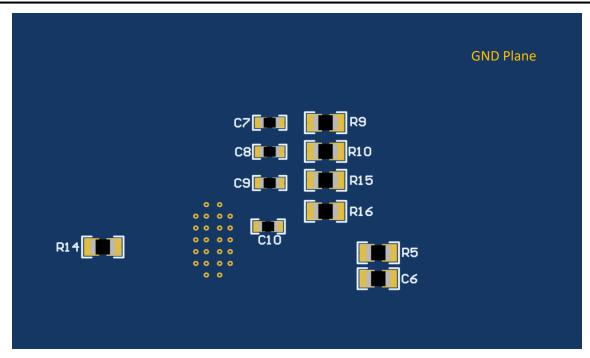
Printed Circuit Board Layout Example: Bottom Layer 3D View
